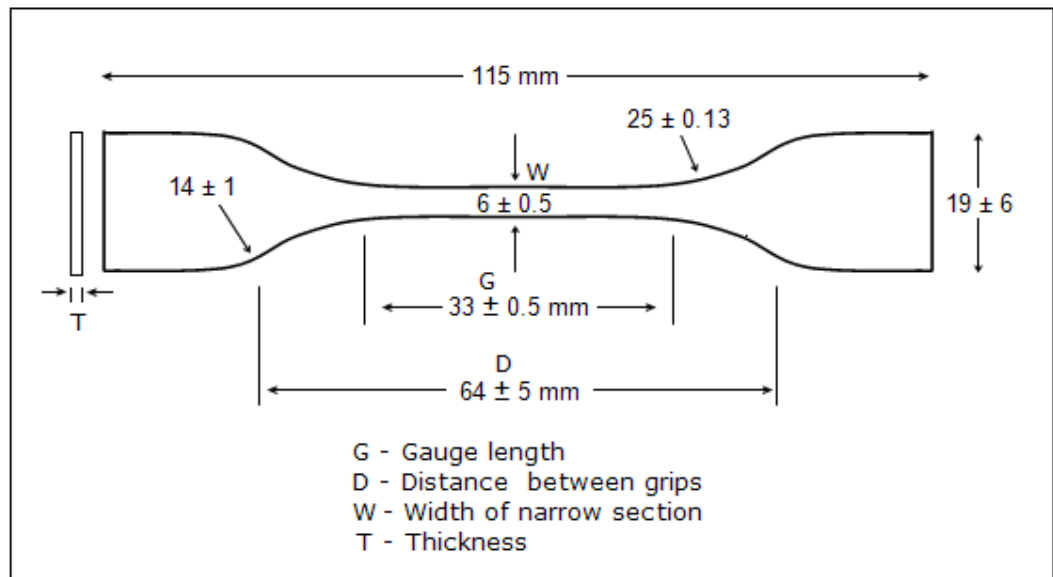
Specimen dimension according to ASTM D638 – type IV. The entire dimension is in mm.
